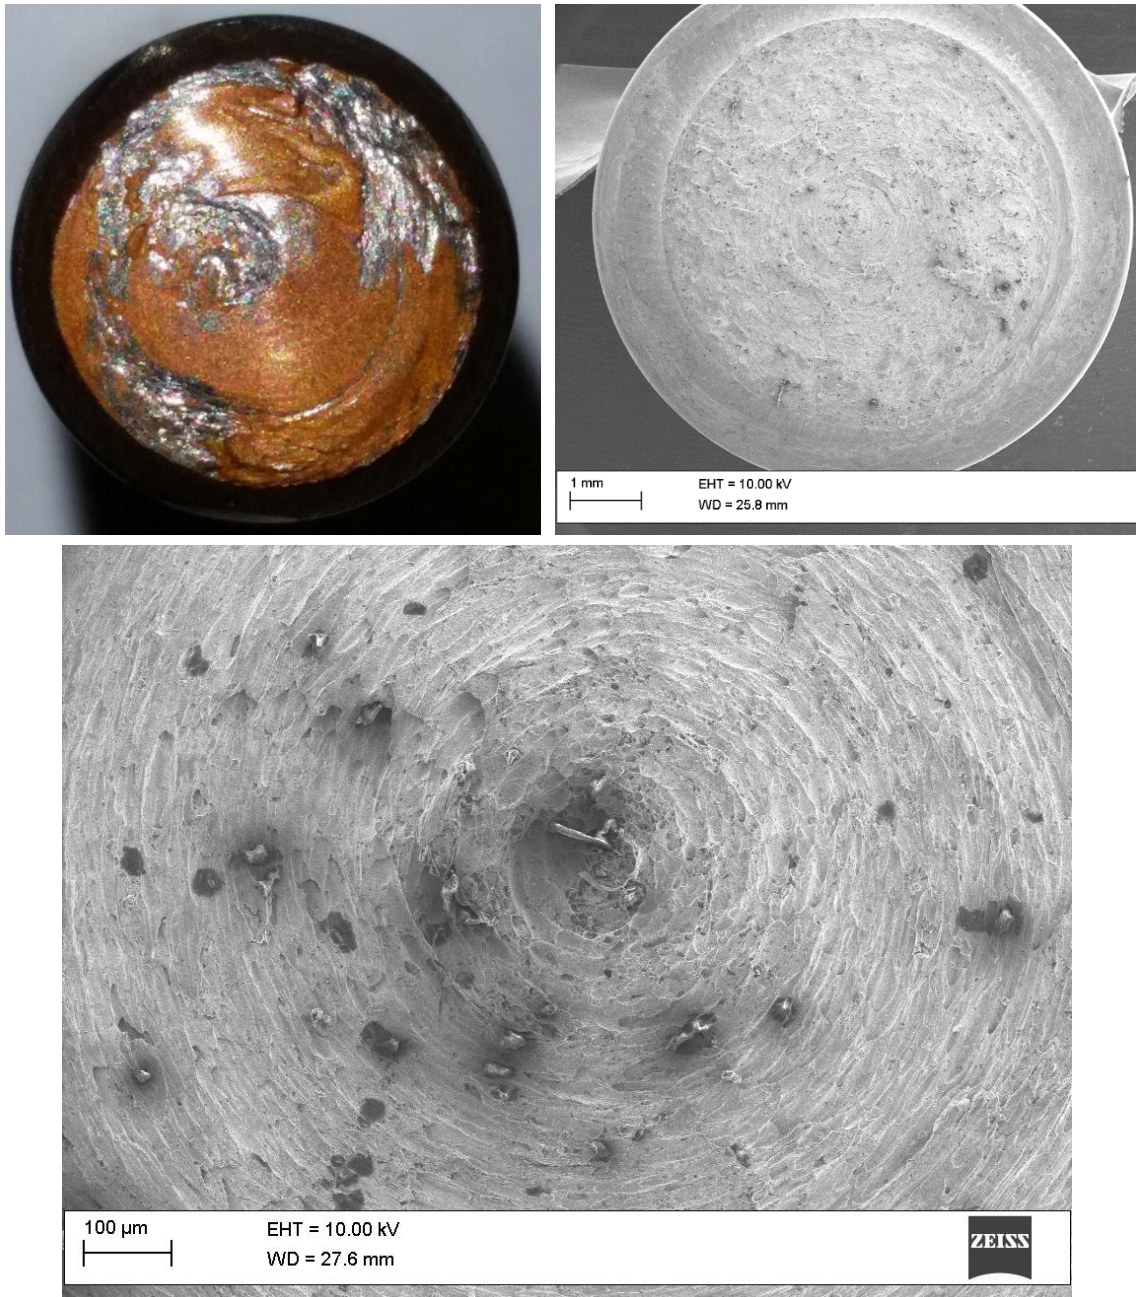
Probe fracture surfaces. Top left is of a heavily damaged, copper covered surface, top right is of probe C that fractured in plunge, bottom is a more magnified image of probe C.
